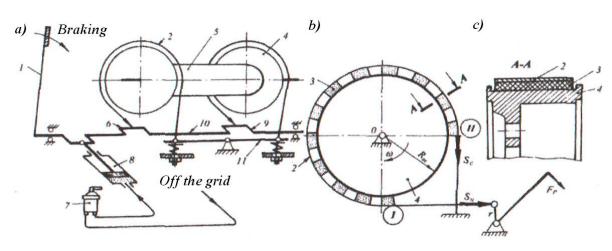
a, b, c - Schemes: kinematic drawworks (a); band-shoe brake (b) and its friction units (c)
